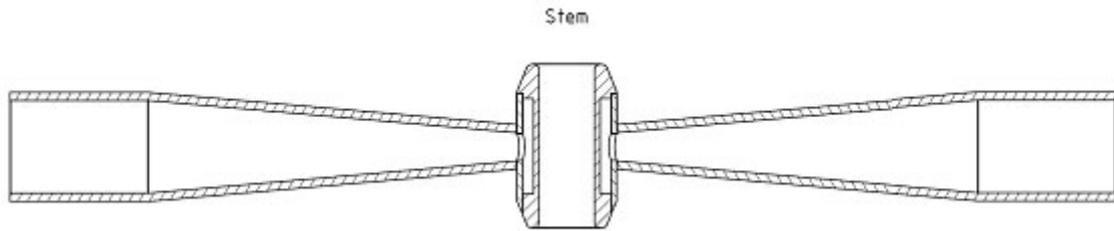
Cross sectional view of a watercooled stem with drift tube
